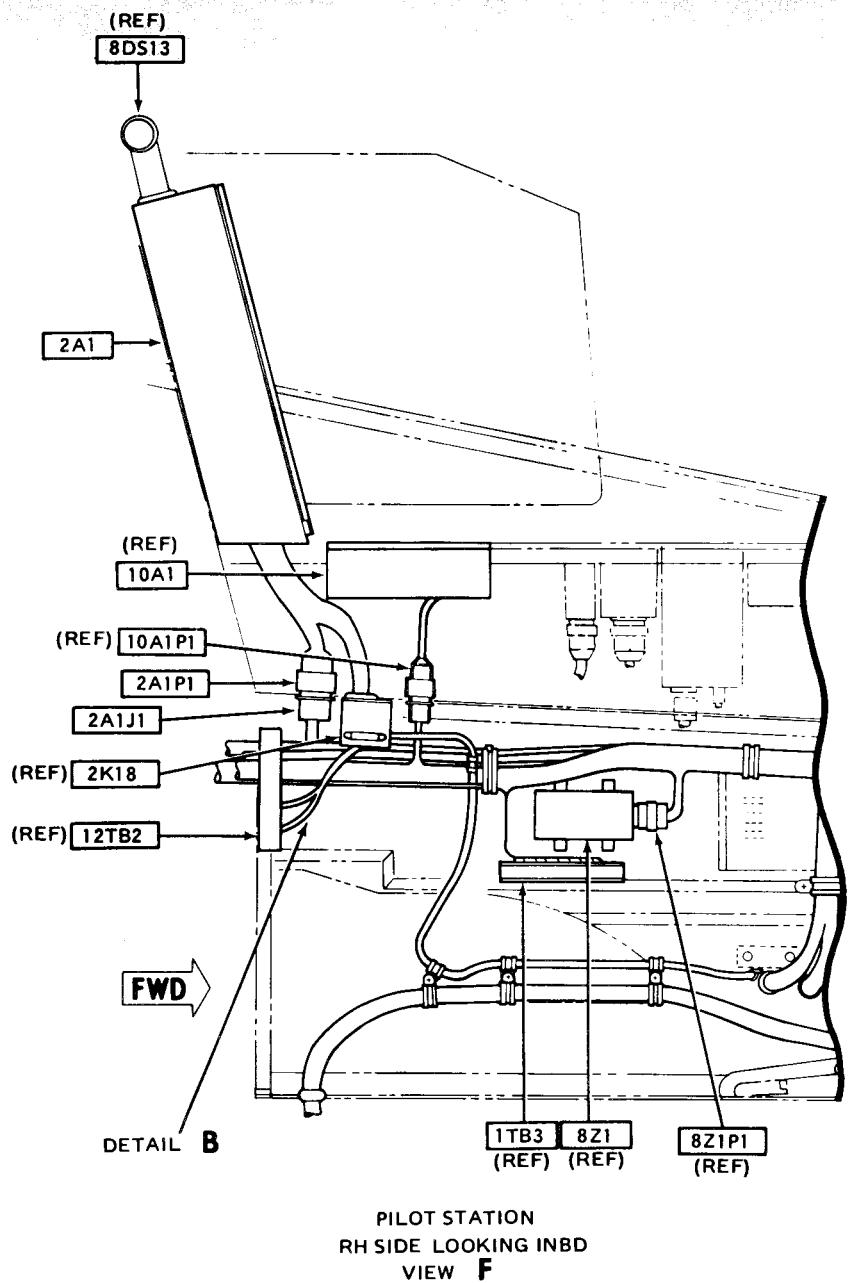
M Fuel Valve and Engine Oil Bypass Valve Systems (Sheet 6 of 8)
